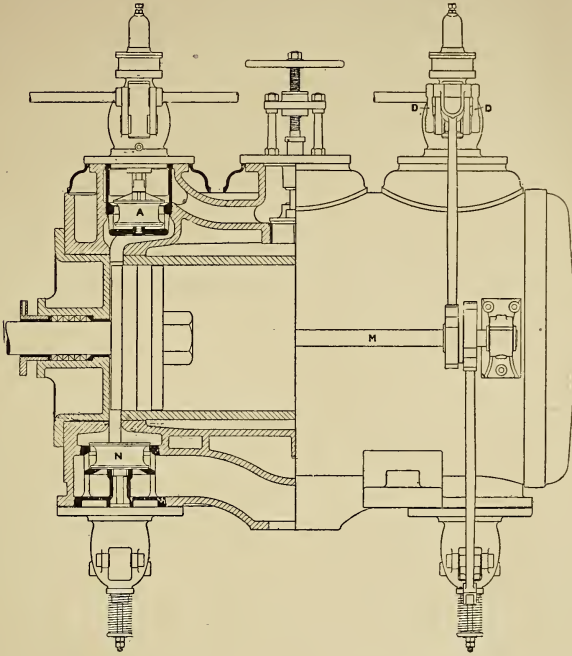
LONGITUDINAL SECTION OF ENGINE CYLINDER WITH MARSHALL'S TRIP GEAR
